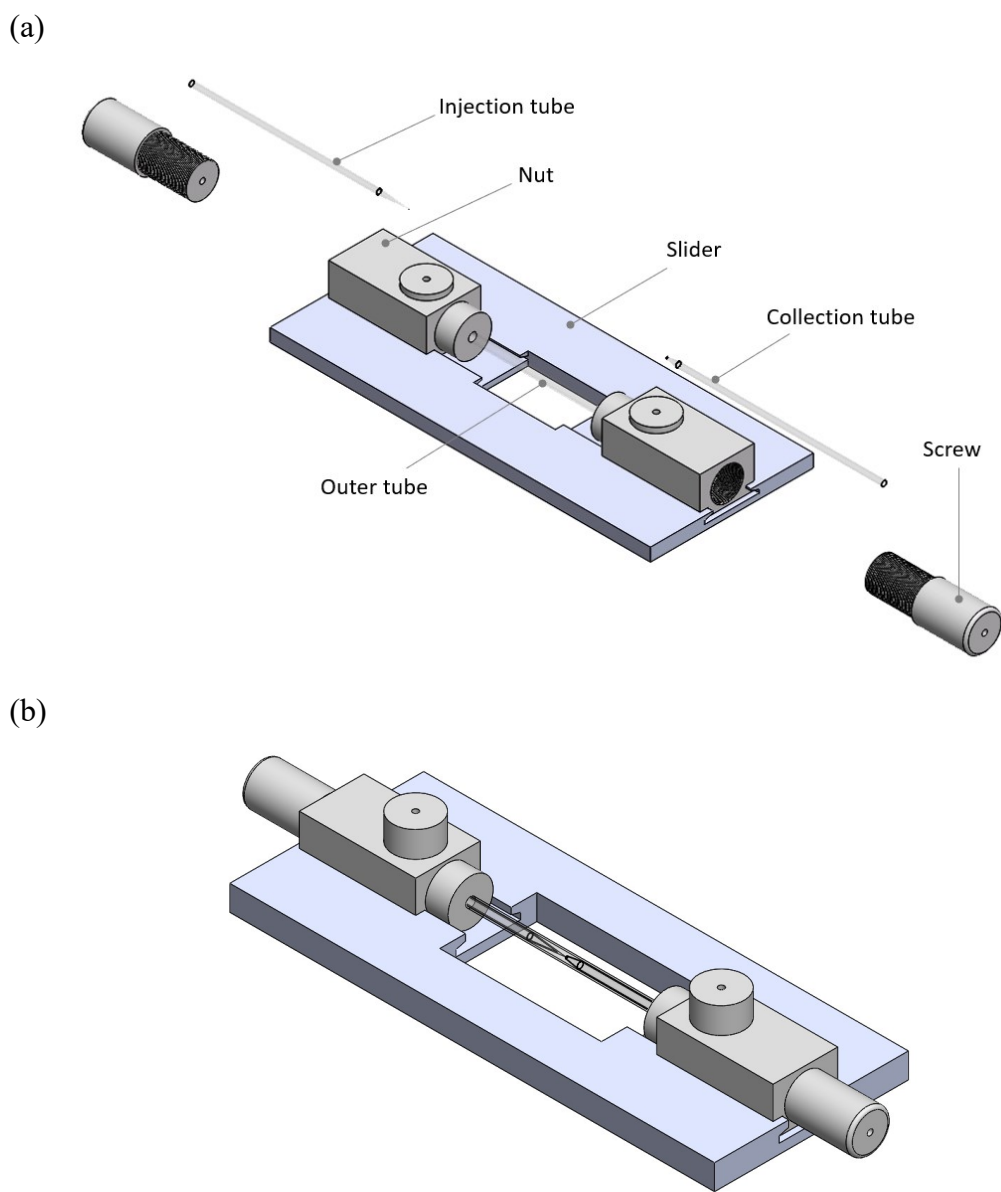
A 3D CAD drawing of the microfluidic device: (a) before; and (b) after assembly.
